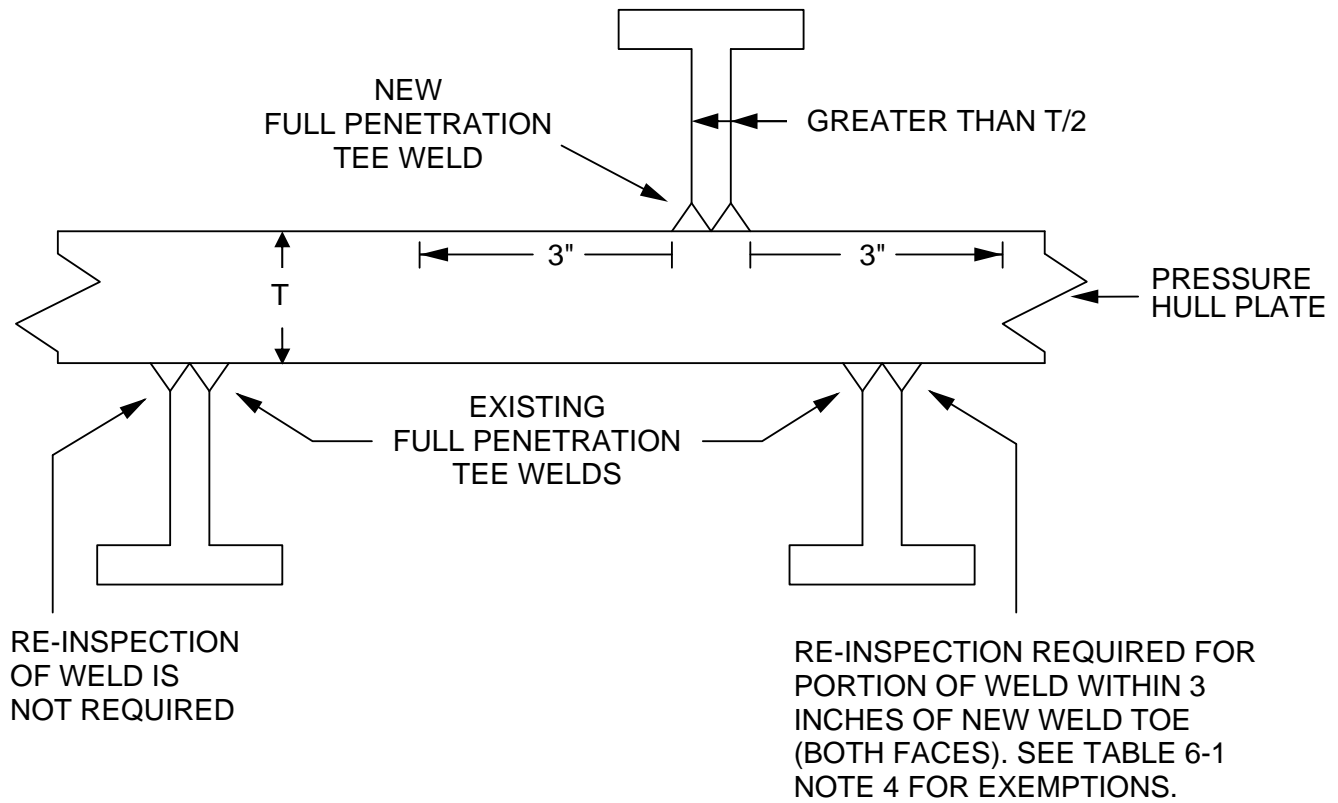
A. MT INSPECTION REQUIREMENTS FOR EXISTING FULL PENETRATION WELDS IN THE VICINITY OF NEW FULL PENETRATION TEE WELD IN PRESSURE HULL ENVELOPE.
